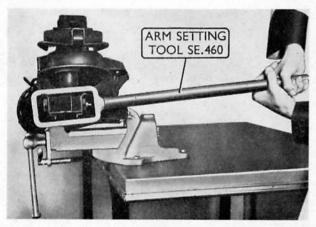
Twisting the lower arm using the arm setting tool to correct slight misalignment with the upper arm. This operation can be carried out on the vehicle if necessary
